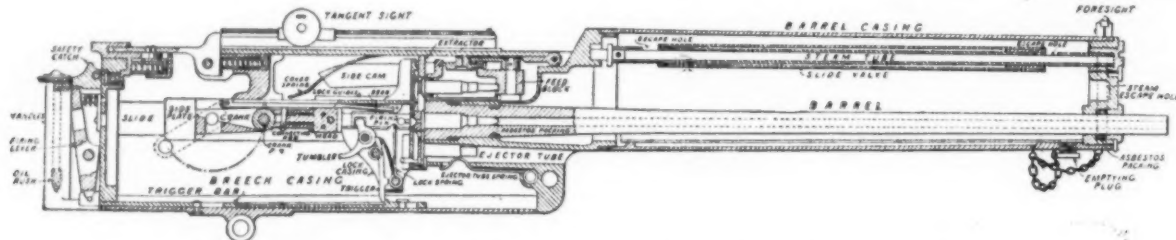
Longitudinal section of Maxim machine gun, showing the parts in position for firing.
